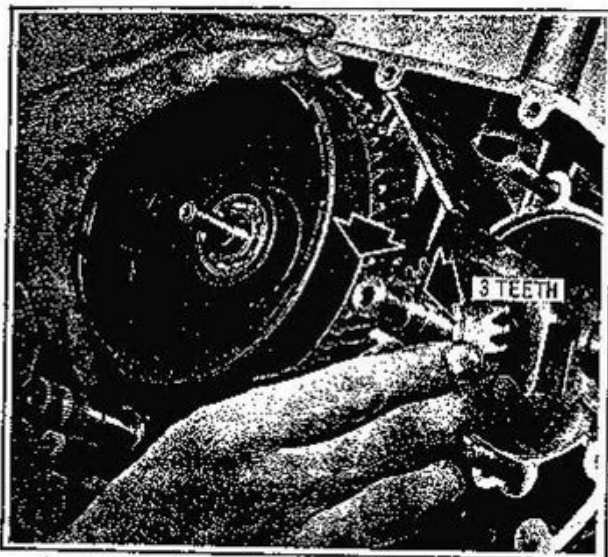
B-41. Preloading Clutch Drive Takeup Gear
